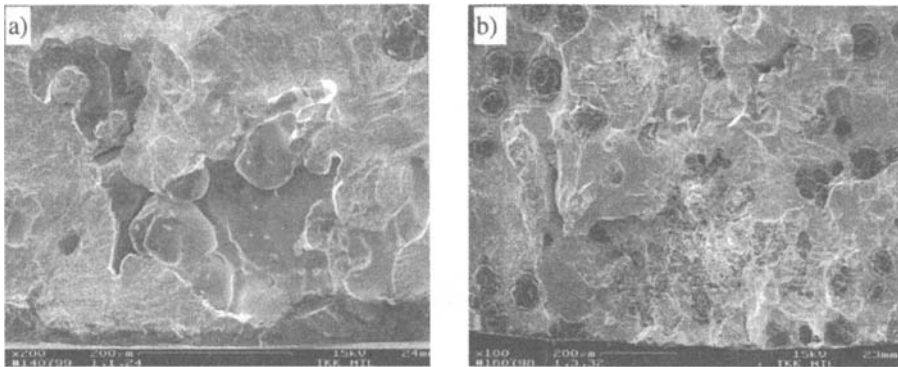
Examples of Defects Leading to Failures: a) Shrinkage Pore and b) Inclusion.
